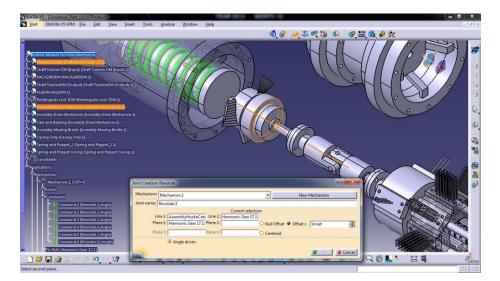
Revolve joint for Harmonic gear and Universal joint.
